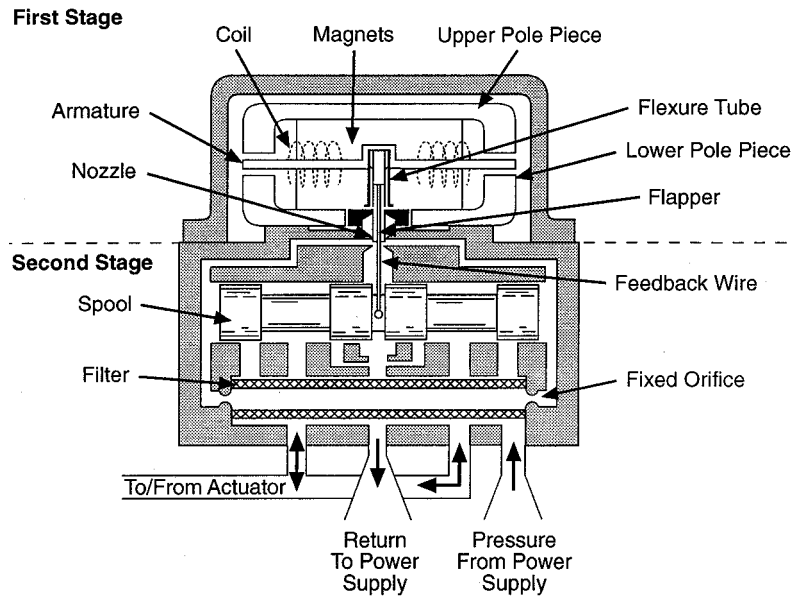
Cross section of a traditional servovalve (MTS model 252). The flapper and flexure tube may be subject to fatigue failure.
